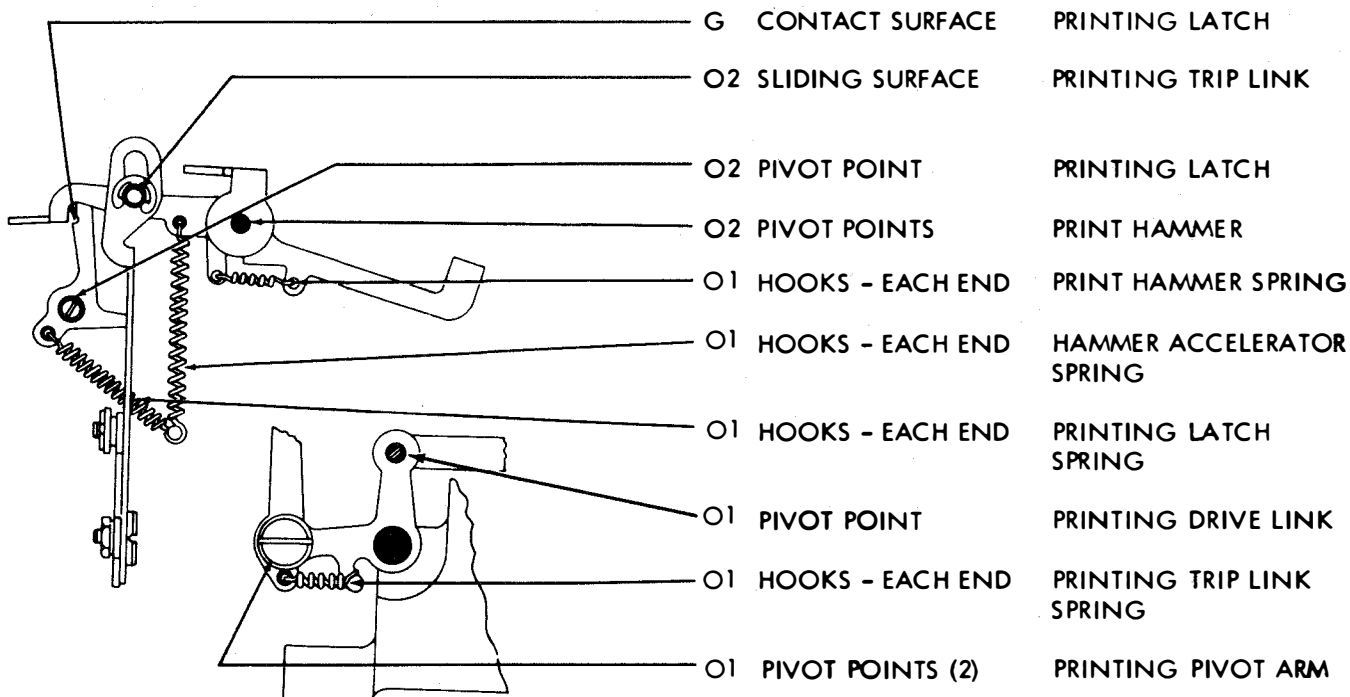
Printing Mechanism with Steel Print Hammer, Left Side View
